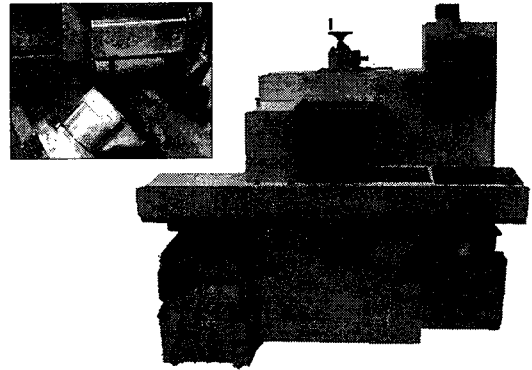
A photograph of an experimental apparatus and view of truing in part (a) of the machine
